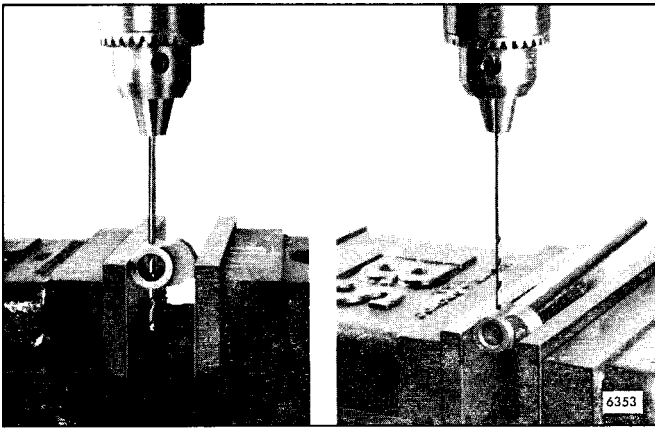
Aligning Drill Bit and Drilling Shaft
